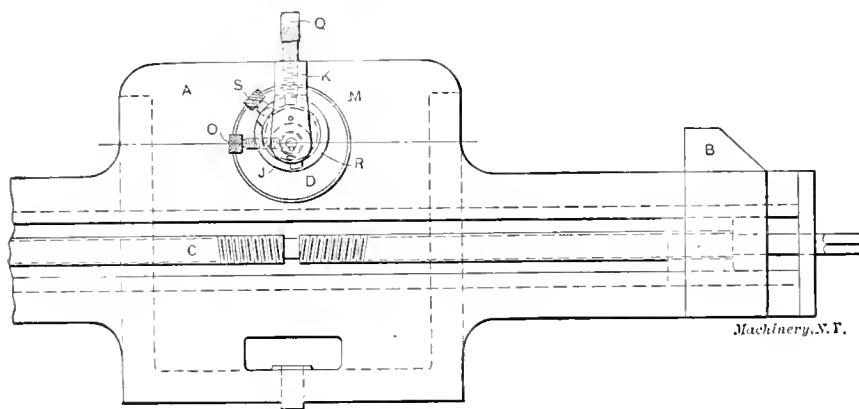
Face View of Attachment showing Vise Jaws for Holding Work.
